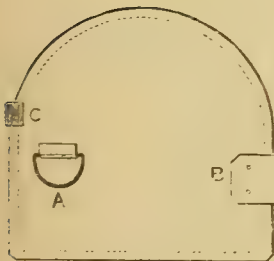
PIECE FOR DOOR (C PIECE). Scale, $\frac{1}{4}$ in. to 1 in.
